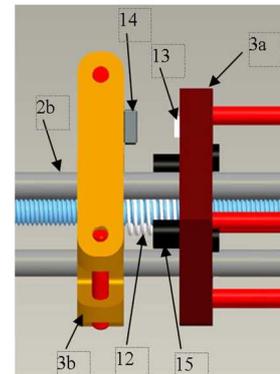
Spring deformation measurement of wheeled machine with adjustable wheels CEREVKA
